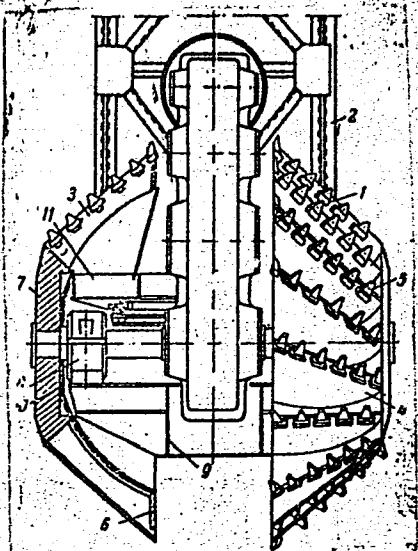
1- rotary working unit; 2- boom; 3- conical rotors; 4- lug-mounted convex cutter; 5- armored teeth; 6- ring; 7- hub; 8- protruding roller of the anchor drive reducer; 9- bearing beam; 10- spherical shell; 11- ring feeder with a drive mechanism
